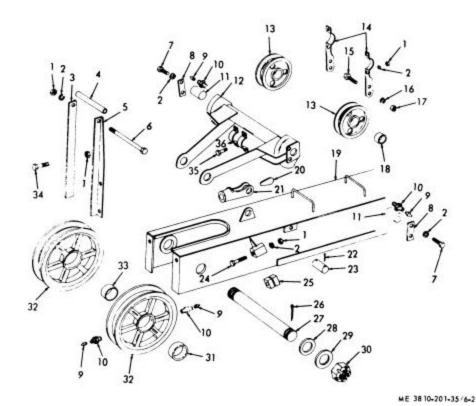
Shipper shaft and saddle blocks, exploded view.
